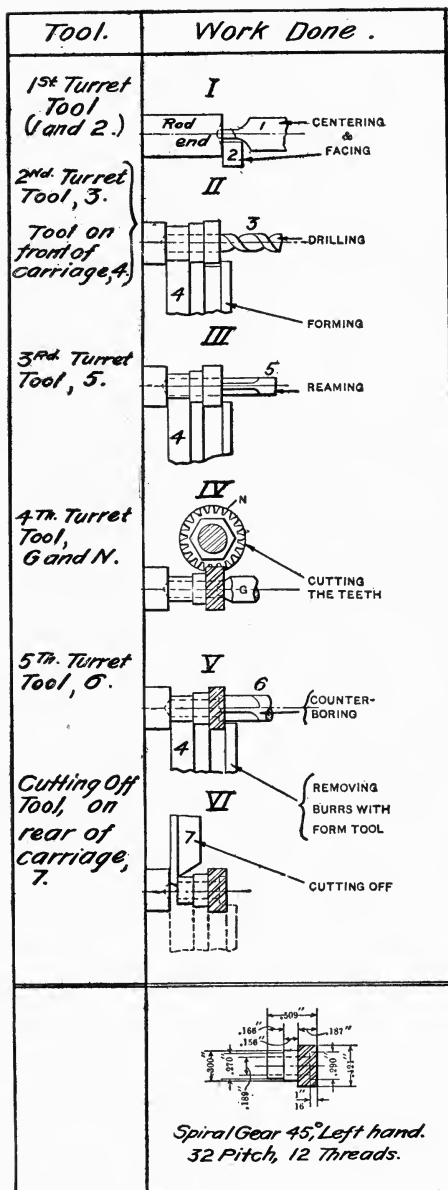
Specimen Operation of Automatic Screw Machine.
